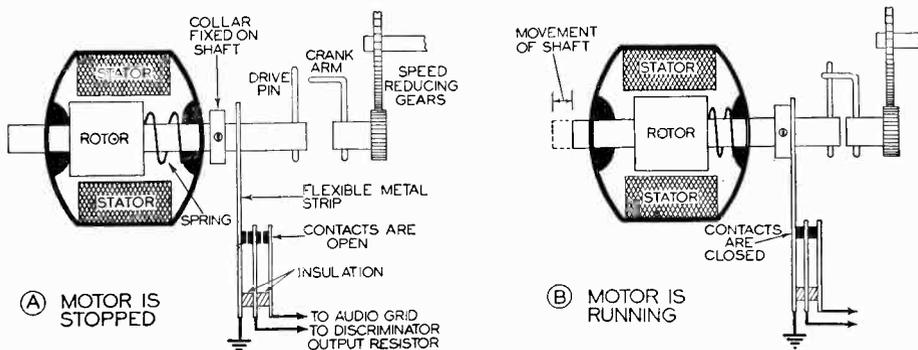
Details of audio-silencing and A.F.C.-releasing switches which are actuated by thrust (end-wise movement) of the motor shaft when voltage is applied to the motor of an electro-mechanical automatic tuning system.
